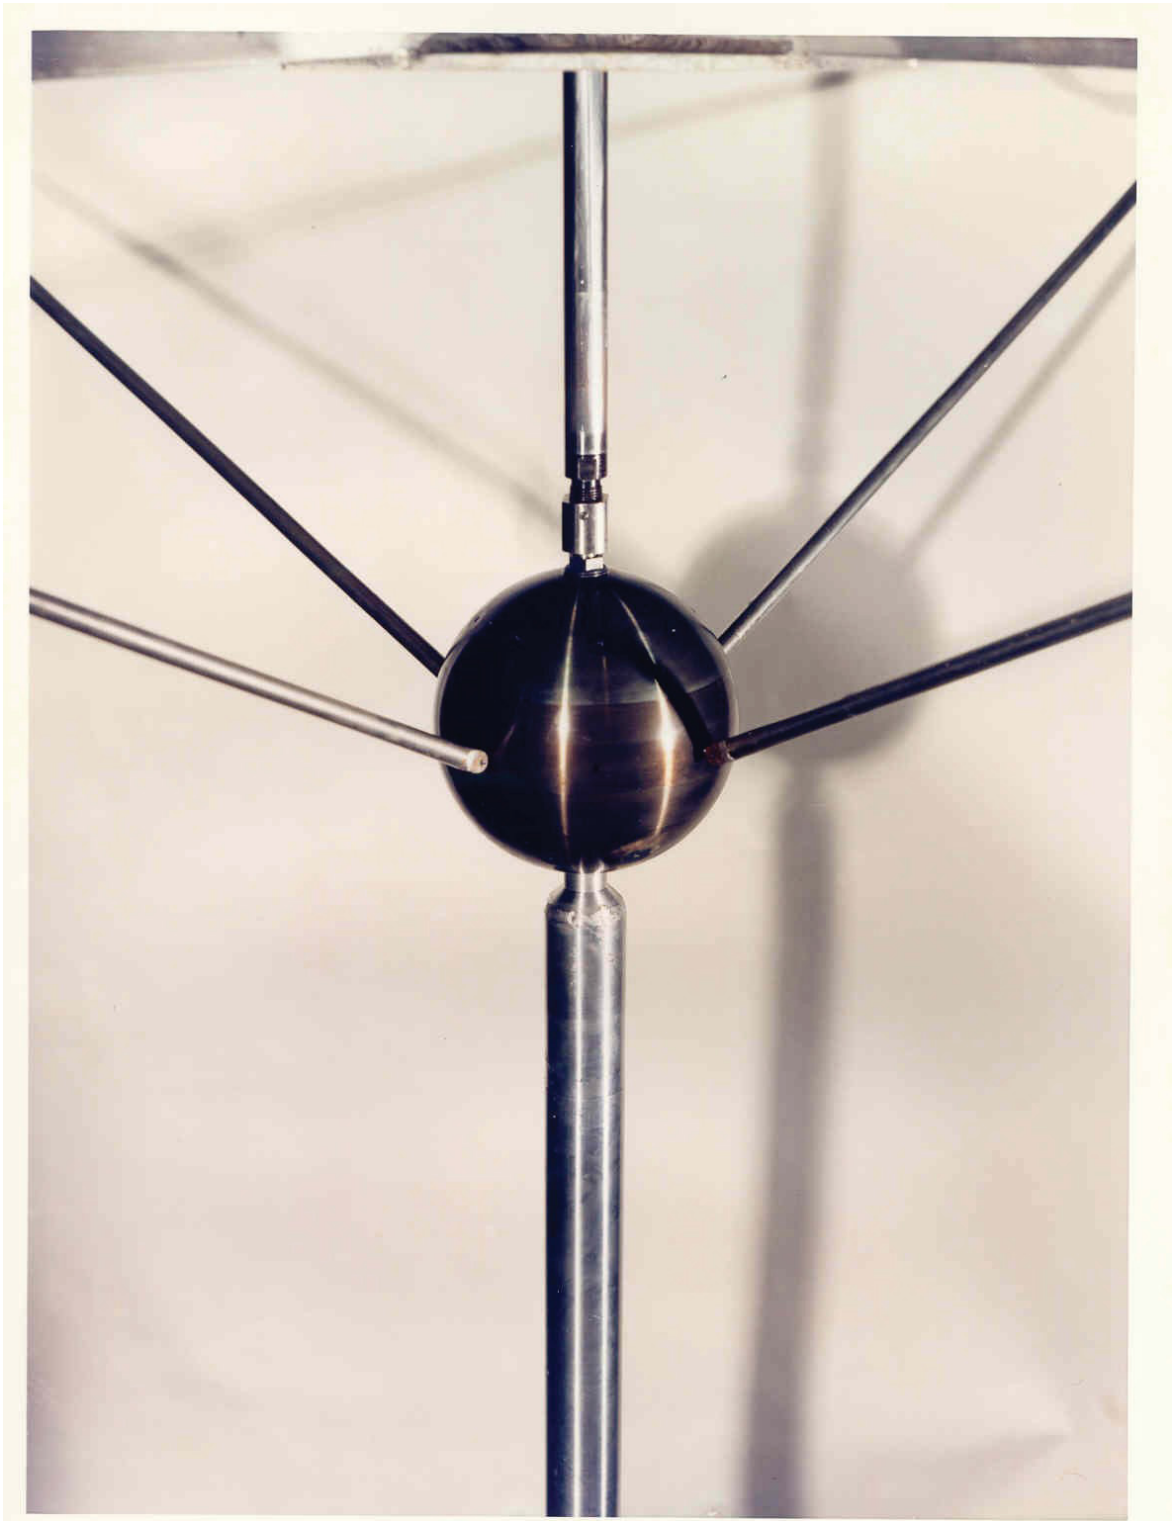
Photograph of the Assembled Three Part Sphere (3.4665-in.-radius).
